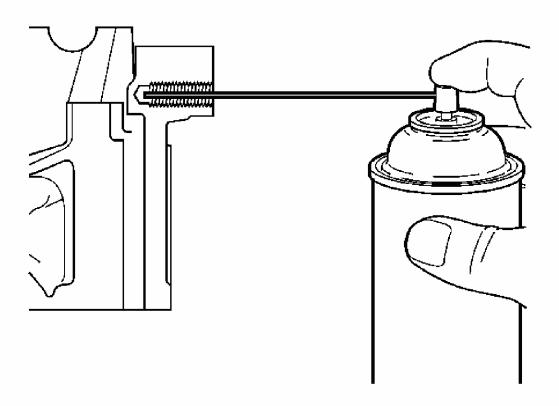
Spraying Cleaner Into Tapped Hole Courtesy of GENERAL MOTORS CORP.
